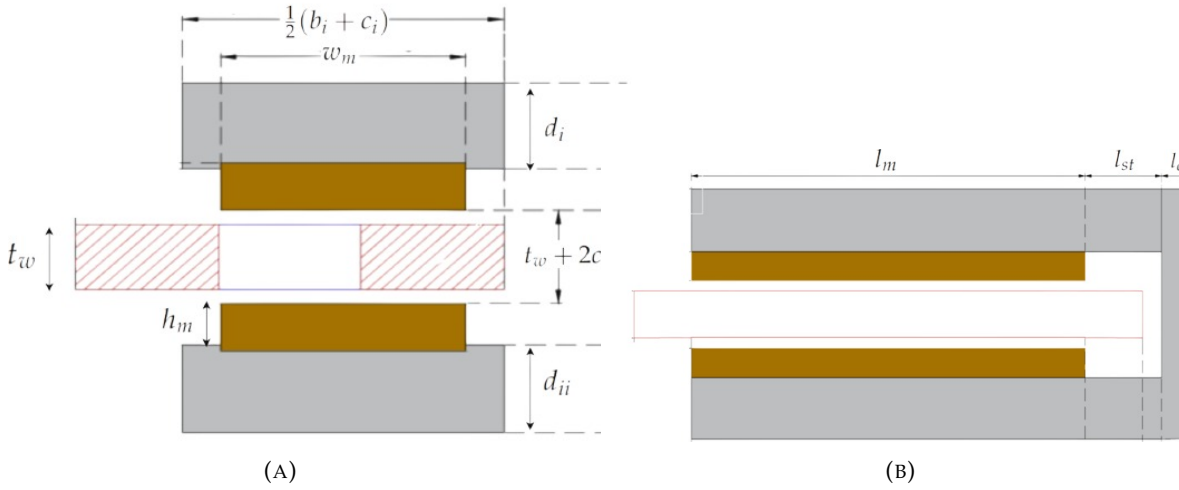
Front view of C-cored module (A), Side view of C-cored module (B) [29]
